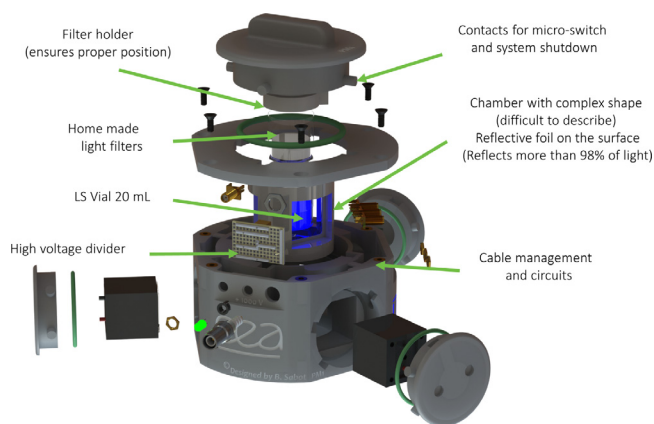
Exploded view of micro-TDCR, the components of the device are all inside producing a very compact device.
